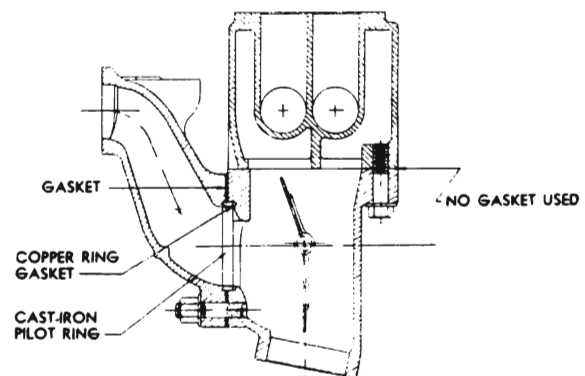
Center Section—Exhaust and Intake Manifold and Heat Trap
